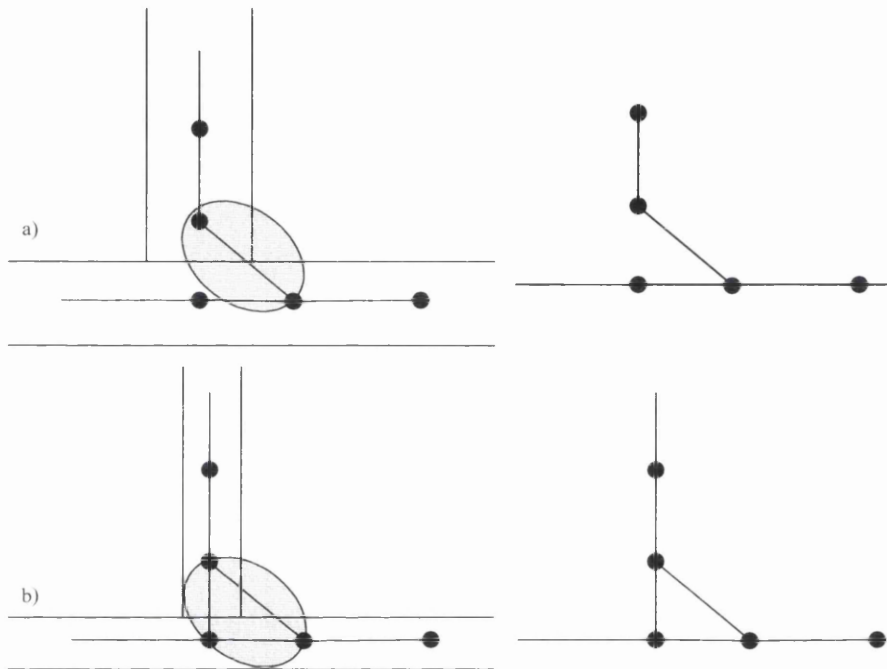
Schematic Diagram of a) Thick Material Welded Joint Used to Generate Original MSC.Fatigue Program, b) Thin Material Welded Joint Used in this Research
